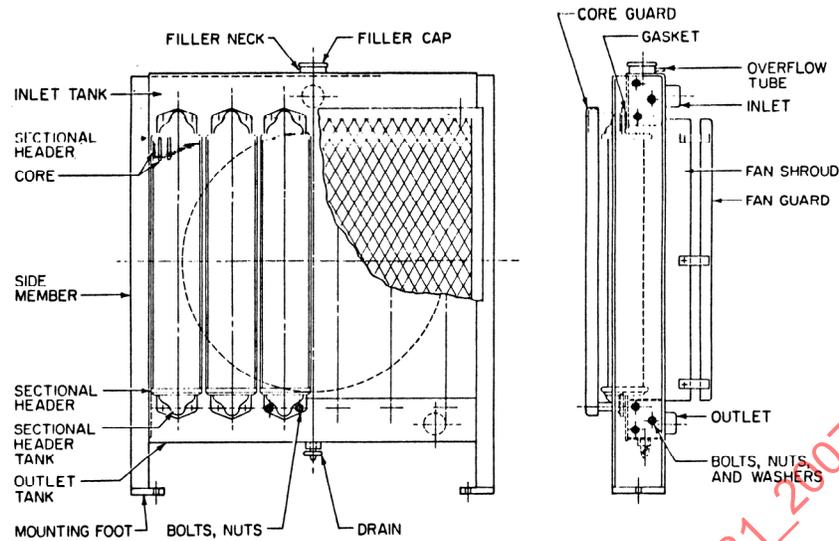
CAST OR FABRICATED TYPE (SECTIONAL CORE) RADIATOR
